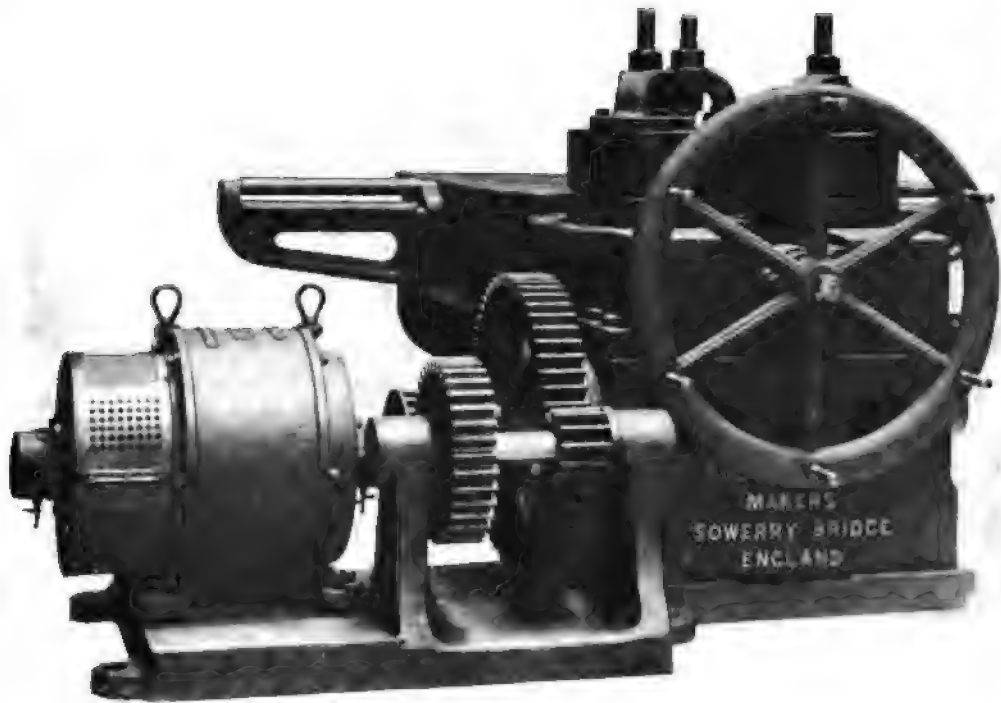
MOTOR-DRIVEN ANGLE BENDING MACHINE. (Rushworth & Co., Sowerby Bridge.
